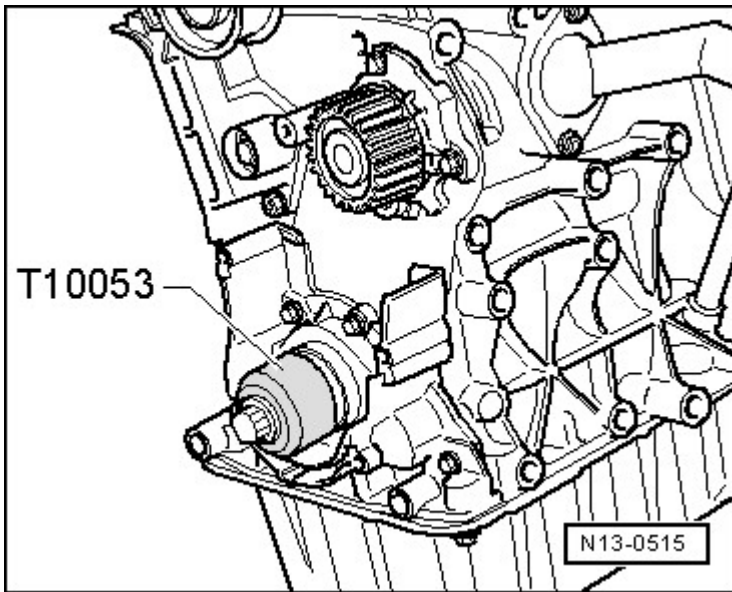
Identifying Press Sleeve T10053 & Bolt Mounted
